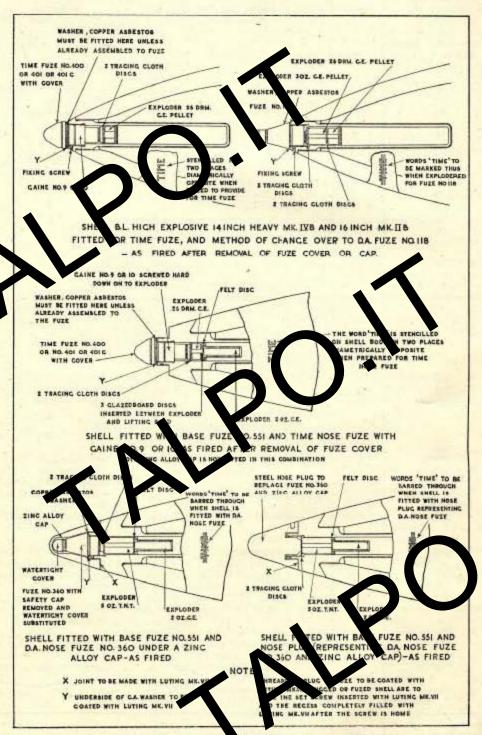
,-FUZES IN 14-IN 15-IN., AND 16-IN. SHELL.
